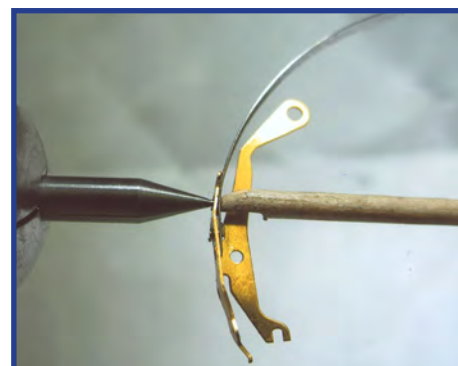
After riveting mainspring and contact spring together at first hole, another hole drilled in mainspring using other hole in contact spring as a guide.
